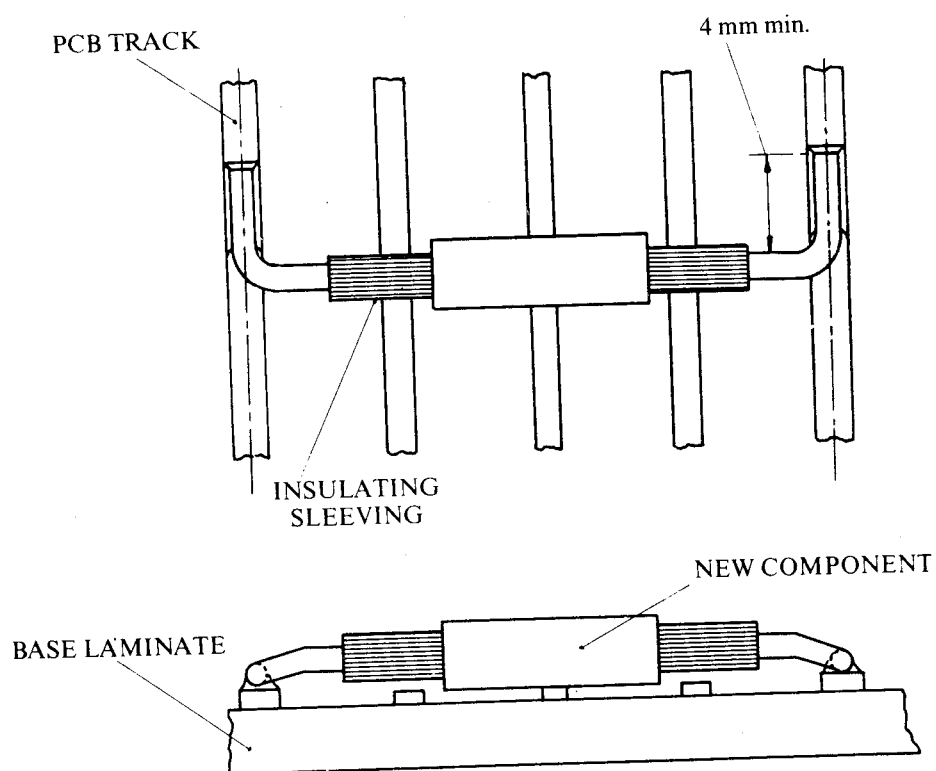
Additional components mounted on reverse (non-component) side of board
